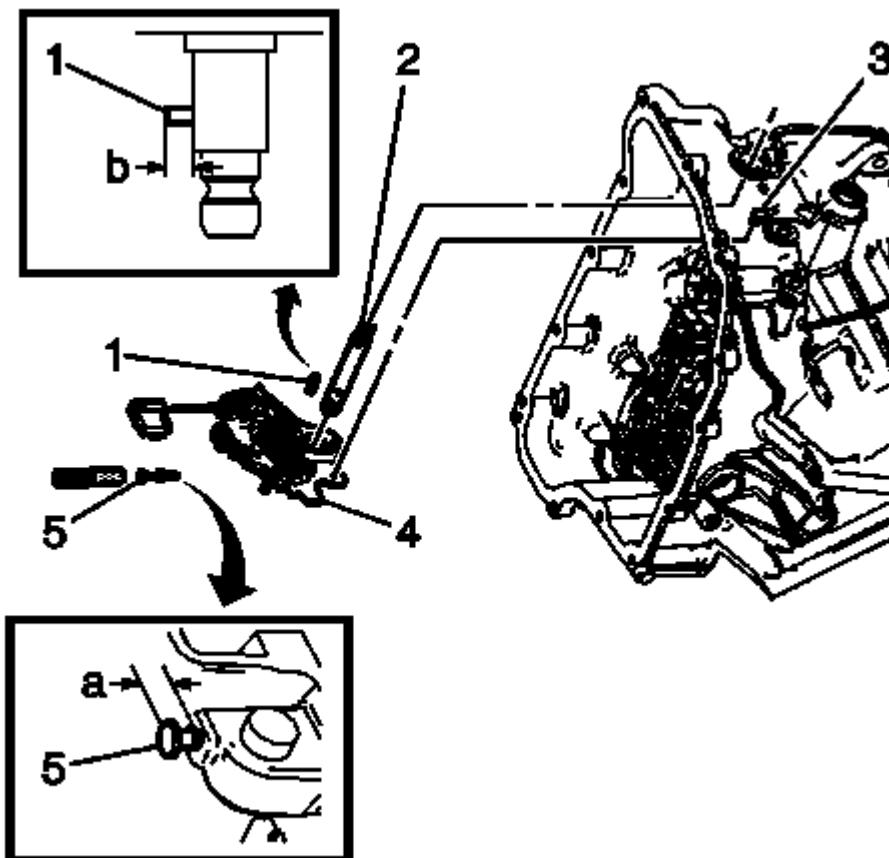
Identifying Manual Shaft Detent (W/Shift Position Switch) Lever Assembly
